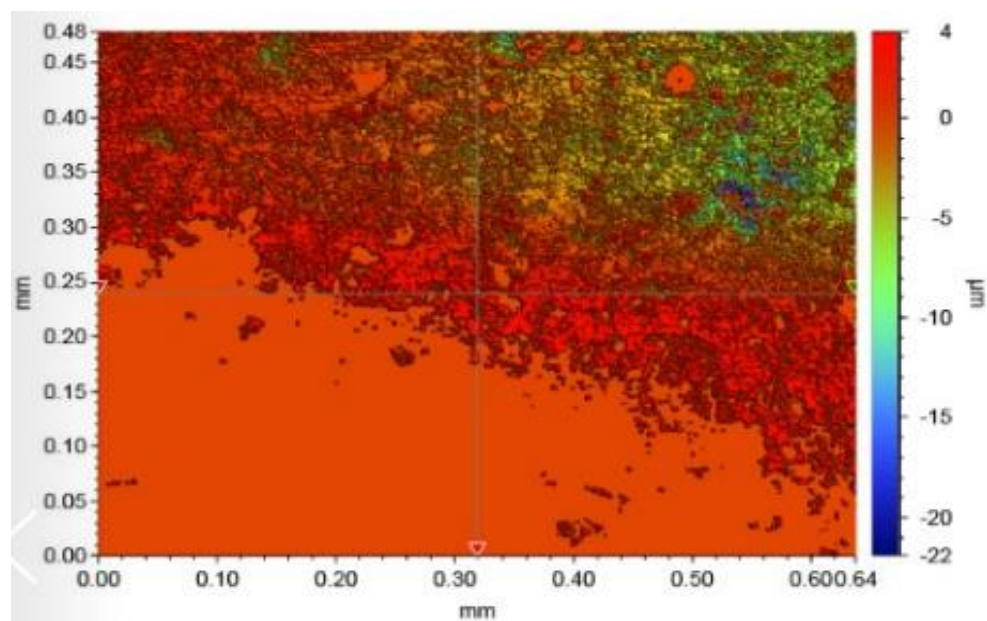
TOPOGRAPHY OF LASER CLEANED GREY CAST IRON BRAKE DISC AT 60W LASER POWER, 900MM/SEC AND 0.72MM SPOT SIZE.
